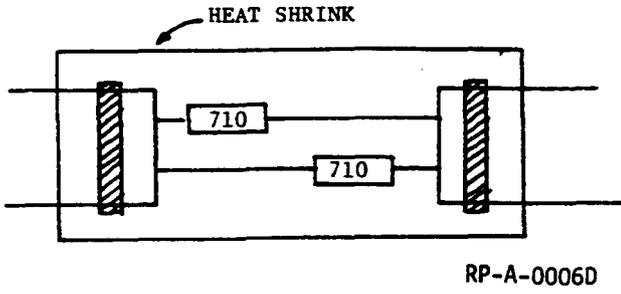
HEAT SHRINK TUBING CENTERED OVER SPLICE (PAR. 5.4.2.3.2D)
